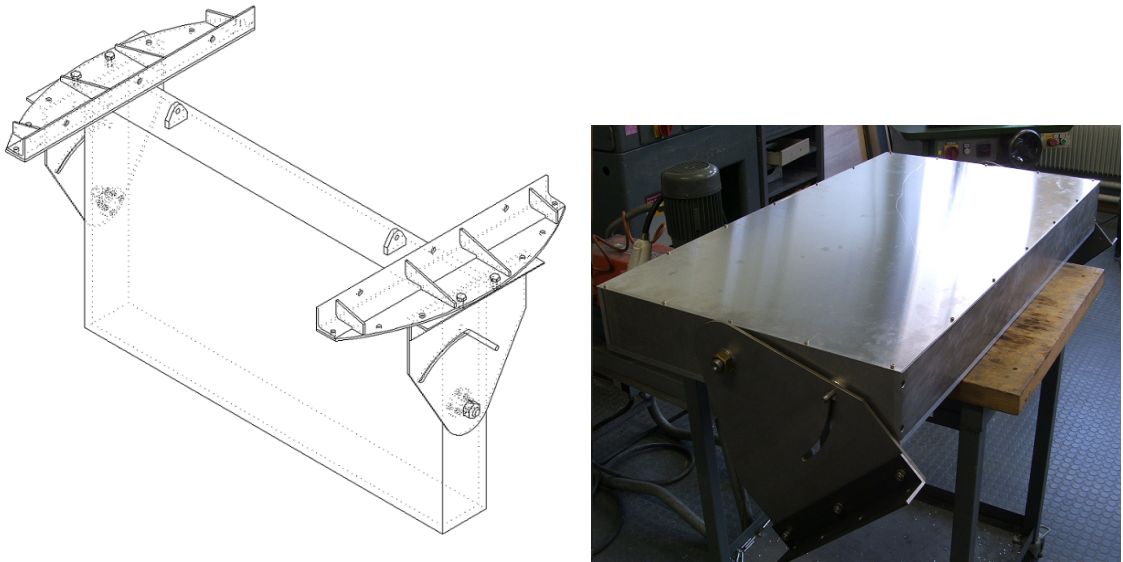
PM Tube box CAD design (left) and the completed box (right).
